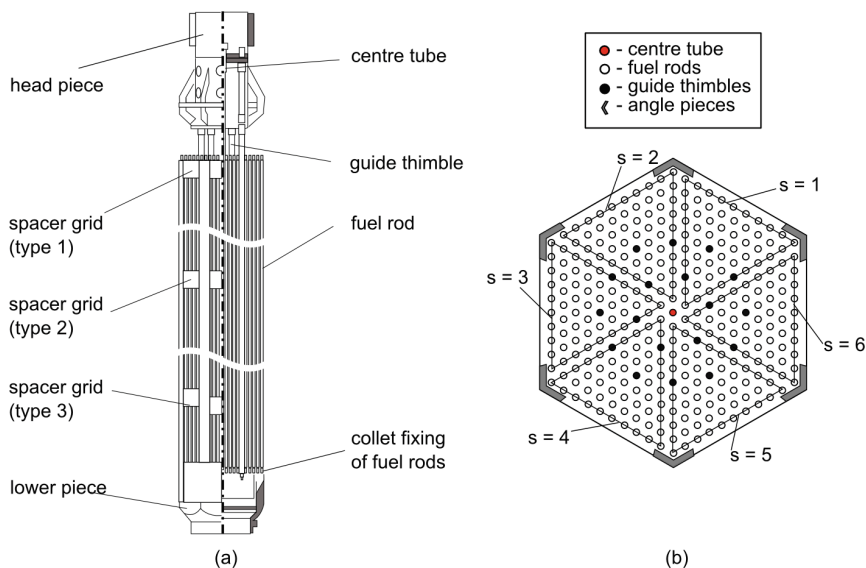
A hexagonal-type fuel assembly—side view (a) and cross-section (b)
